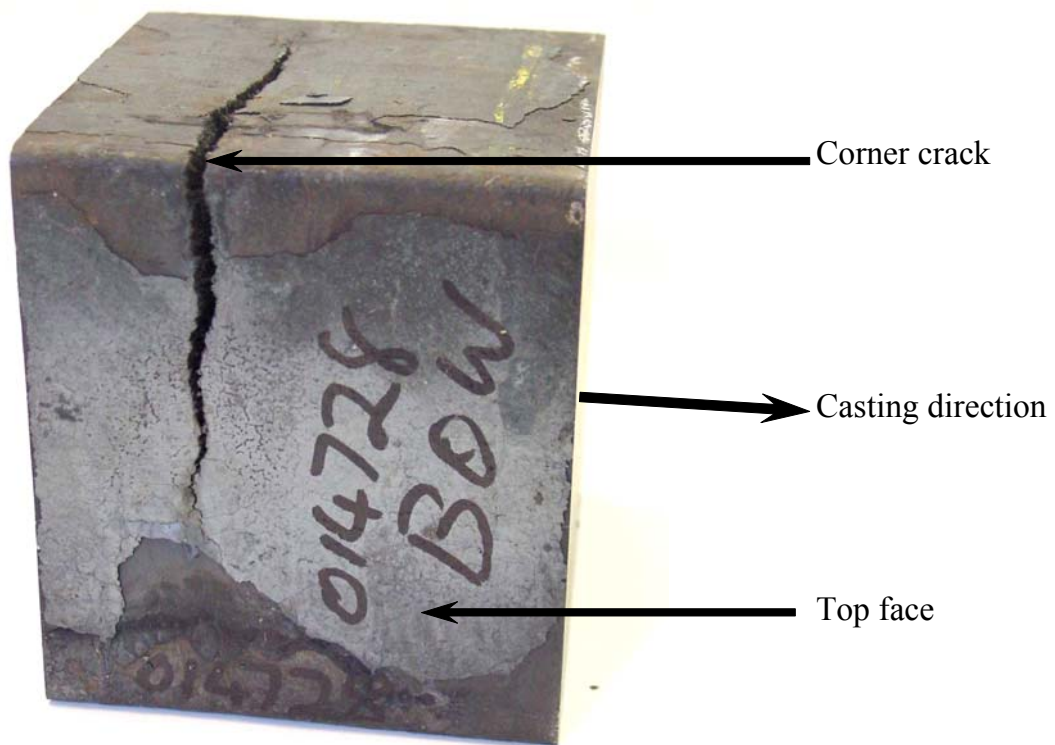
Photograph of a section of industrially cast steel *SiB-1* billet, showing a severe transverse corner crack.
